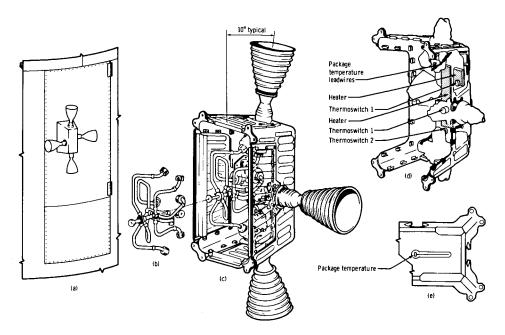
The SM RCS quad engine package (Block II). (a) Quad; (b) Engine package propellant manifold; (c) Complete engine package assembly; (d) Engine mounting structure, inboard view; (e) Engine mounting structure, outboard view.
